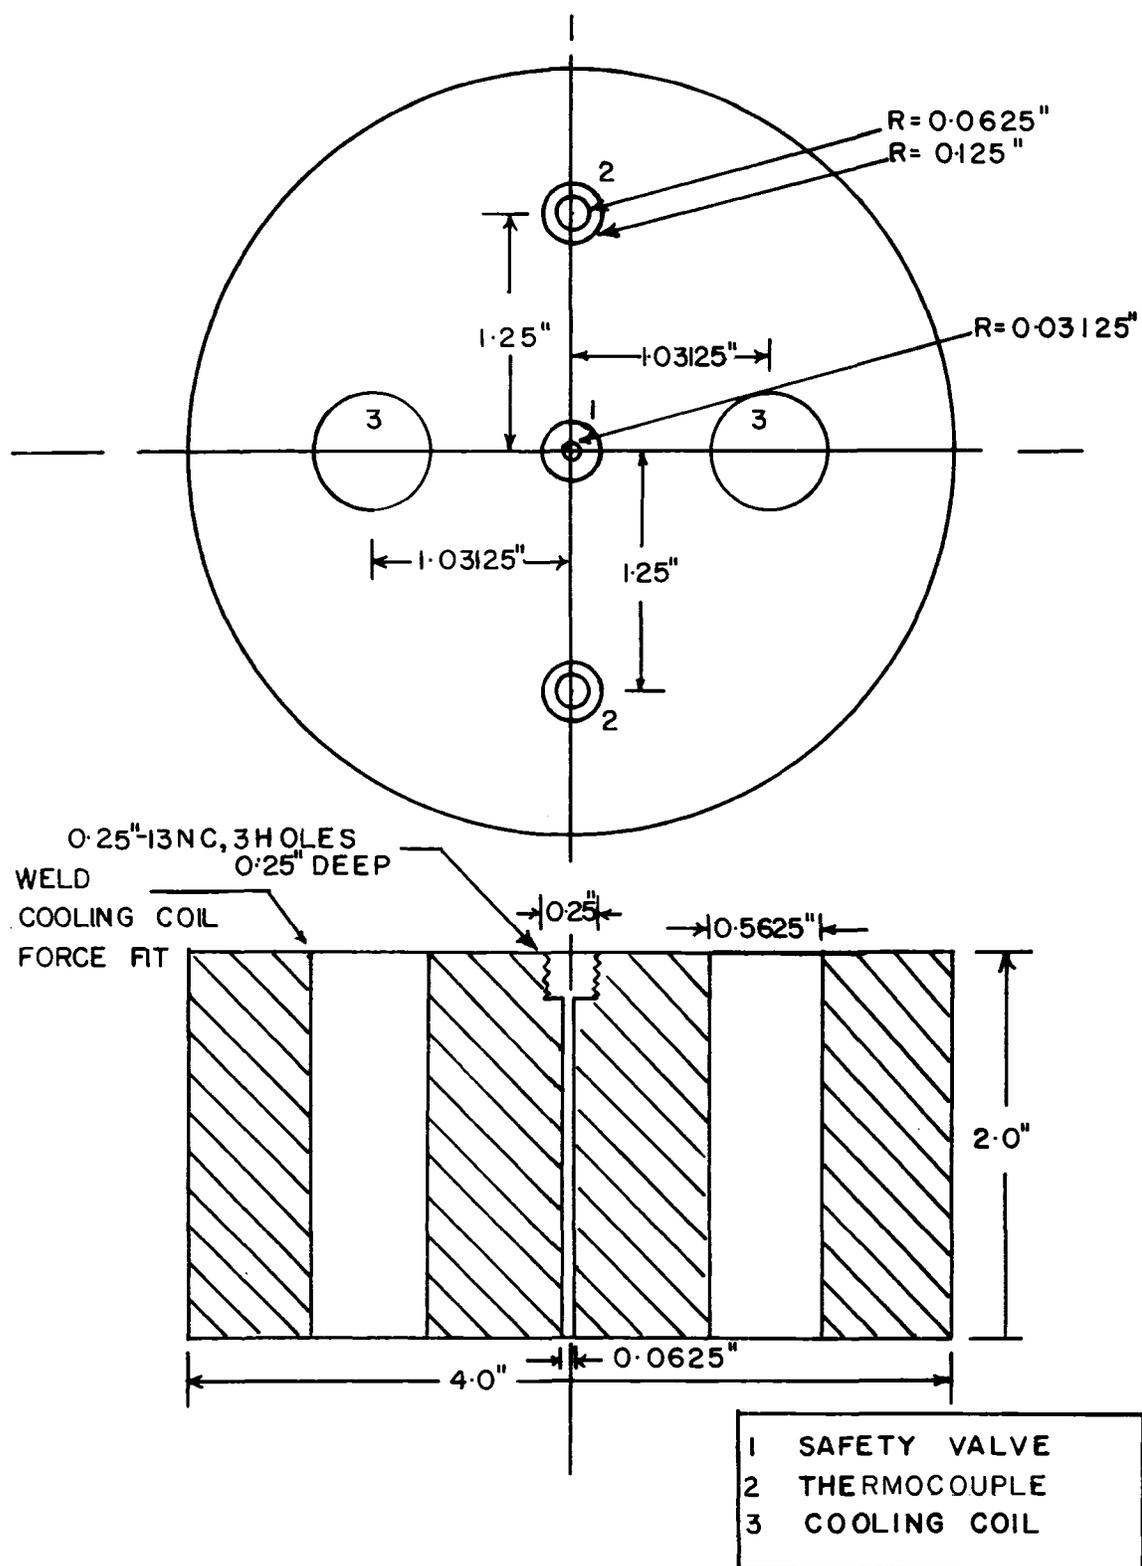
DESIGN SPECIFICATIONS FOR INSTALLATION OF SAFETY VALVE, THERMOCOUPLES & COOLING COIL INTO REACTOR HEAD. SCALE 1"=1"
